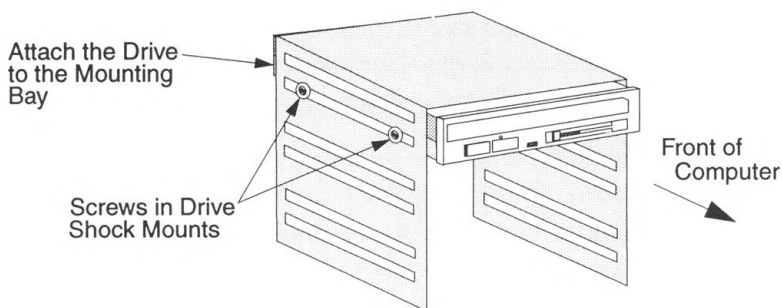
Mounting the Drive In a 3.5-inch Mounting Bay (Front View)
